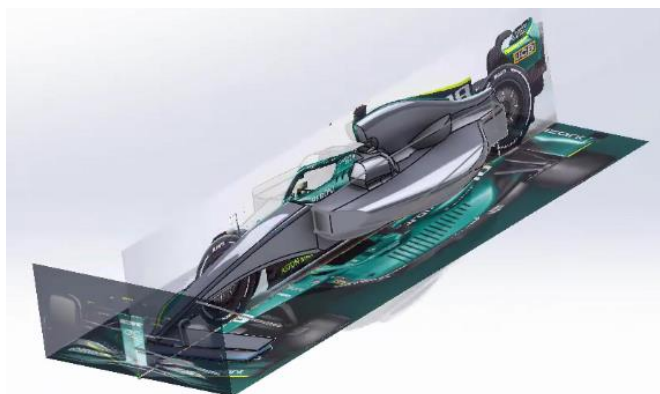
ADVANCED CAD CAM (2022) Formula 1 modelling using SolidWorks: Referencing actual F1 car to the three dimensional planes. <https://www.youtube.com/watch?v=d4JekwWQA3w>.
